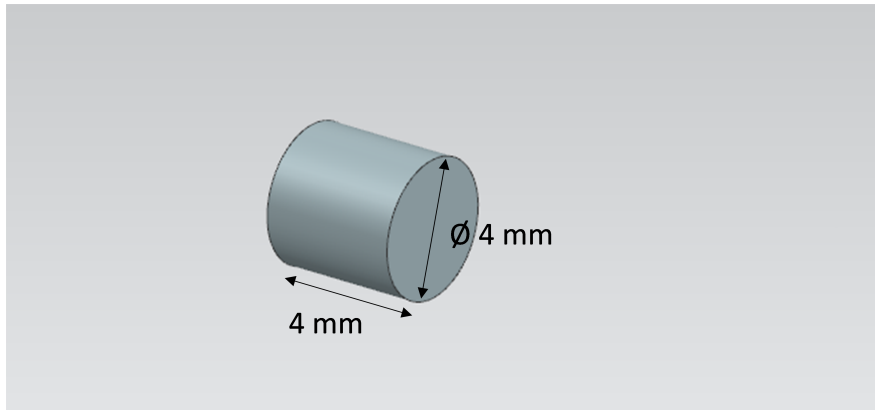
CAD representation of volumetric heat source for the FSW weld
